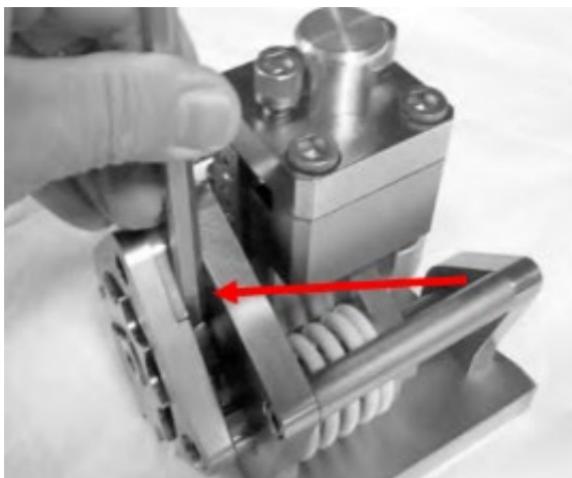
Checking Guide Bar Support Plate & Tracking Bar End Plate Gap.
